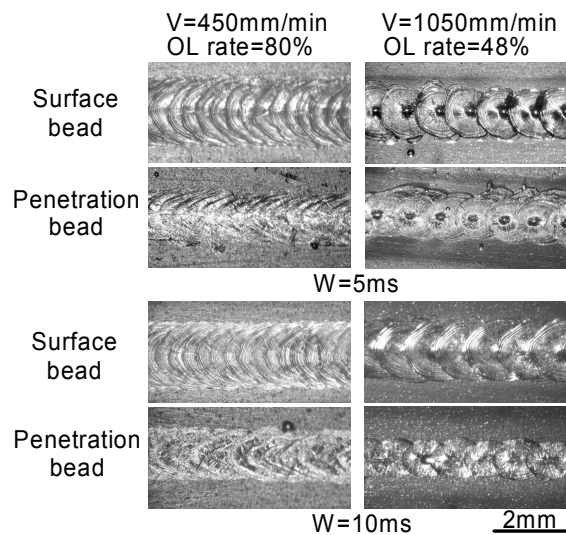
Bead appearances of welded joints. (Q=400W)
